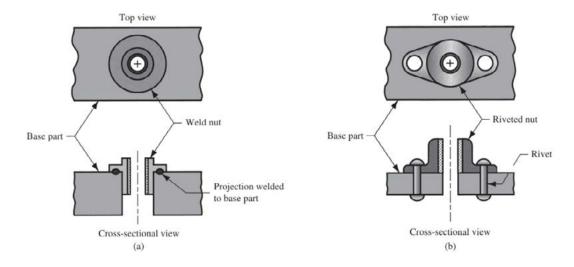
Captive threaded fasteners: (a) weld nut and (b) riveted nut
